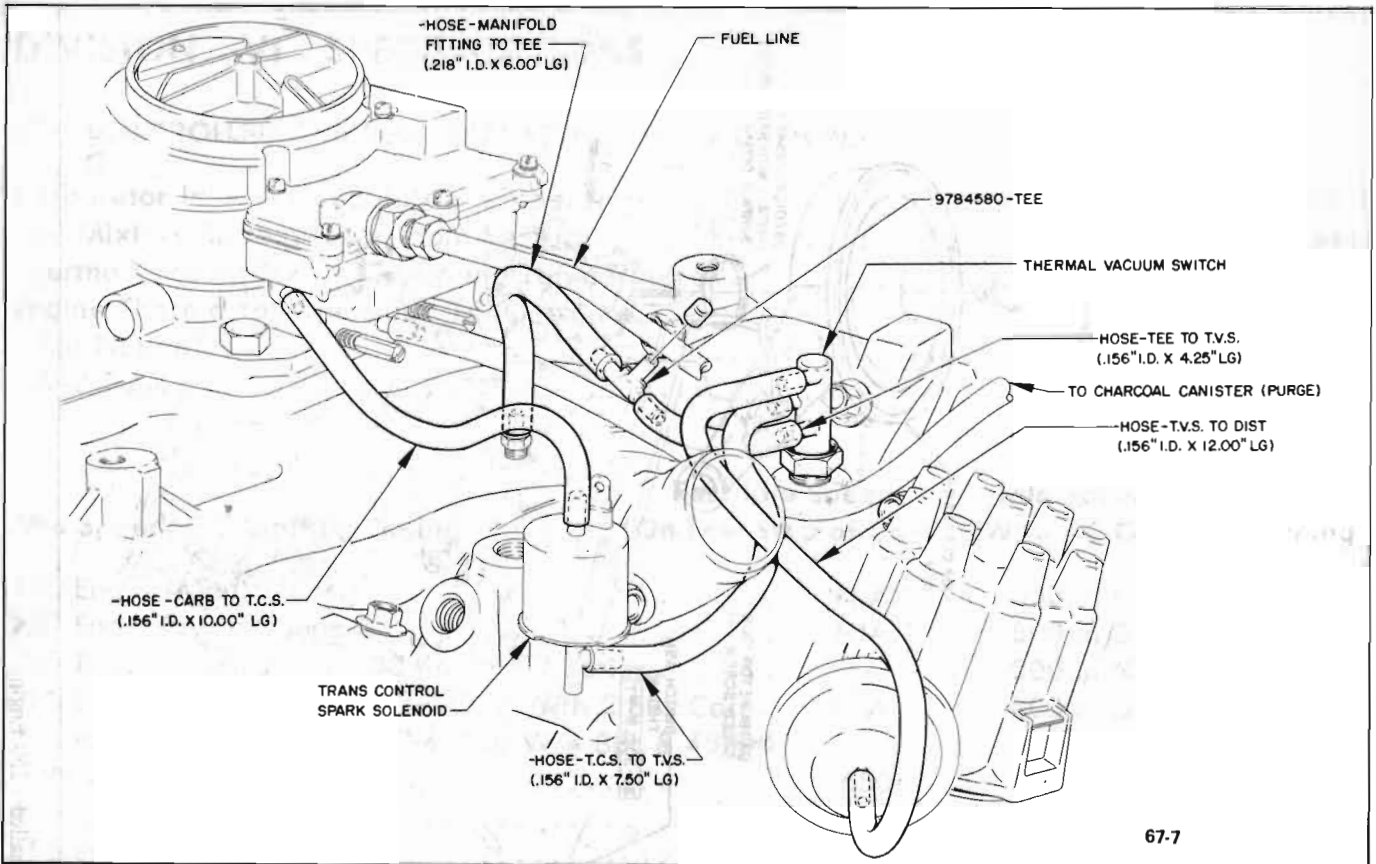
Vacuum Tube Routing - 350-2 Barrel 43-44000 With Heavy Duty Cooling
